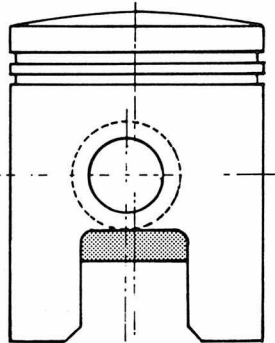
The shaded section shown should be removed up to the piston pin boss. Be sure edges are rounded.
